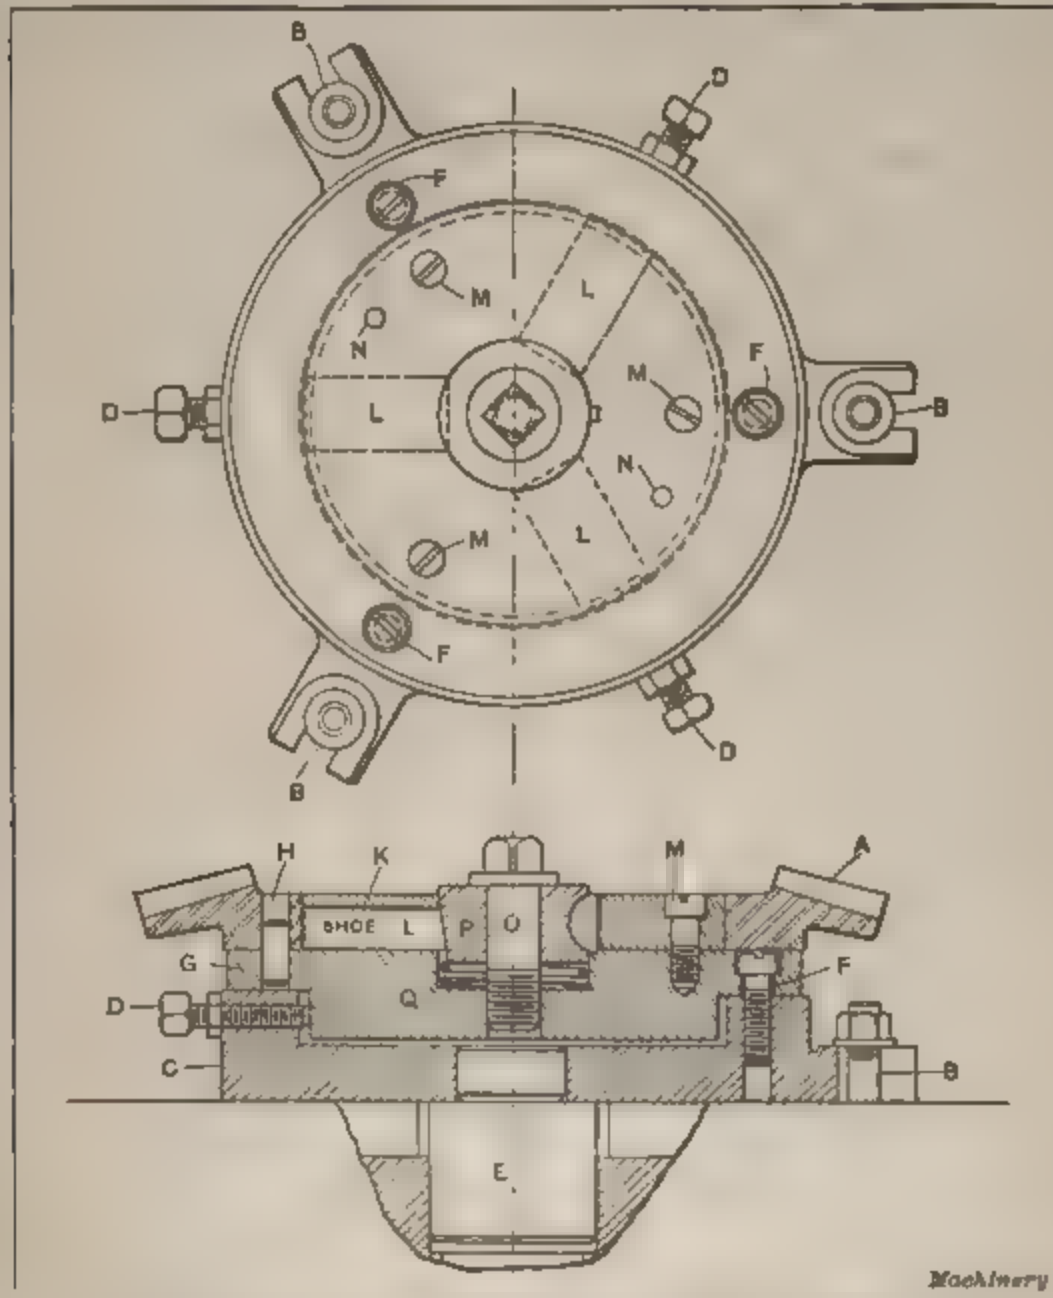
Vertical Boring Mill Fixture for holding Bevel Gear—The Three Shoes L are forced outward by Plug in Center
